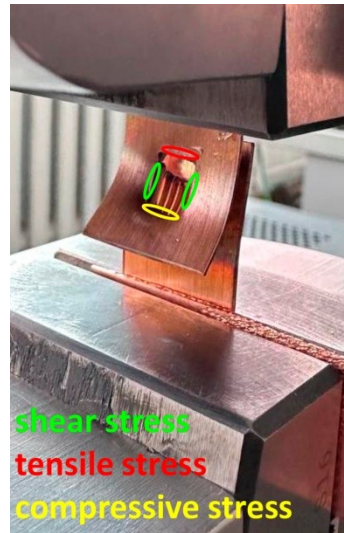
Welded sampe in wedge grips of the testing machine during tensile lap shear tests.
